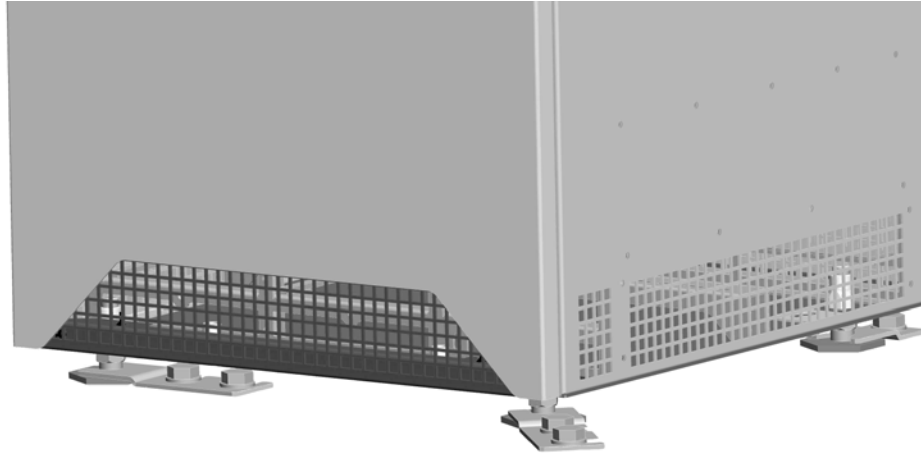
MTS 4 and Expansion Cabinet – Drill Hole Position for the Mounting Brackets
